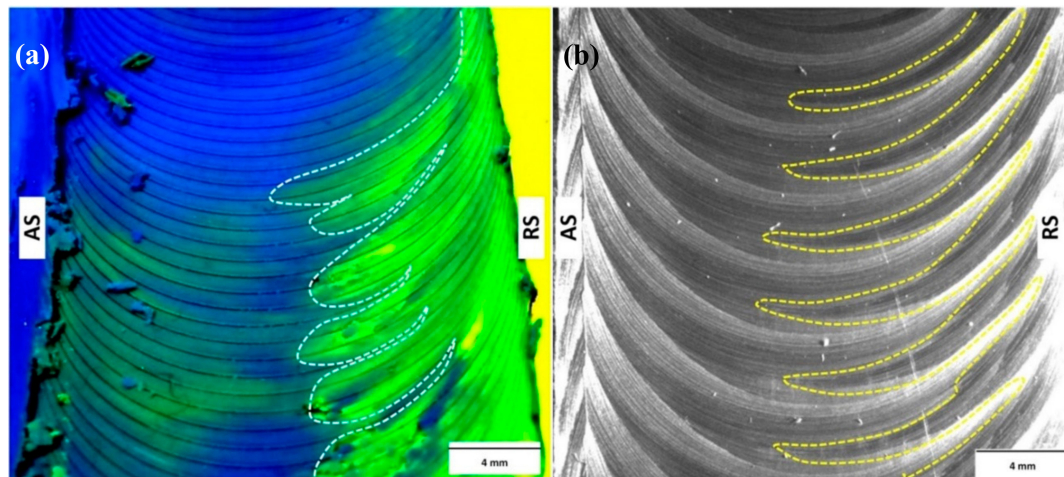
Macroscopic structural features of bobbin friction stir welding, (a) plasticine slab (75 rpm, 50 mm/min), and (b) AA6082-T6 aluminium plate (650 rpm, 400 mm/min). In both cases, the rotation is clockwise when viewed from above, although, this view is from below. Figure shows the common features. Image adapted from Tamadon et al., *Metals*; published by MDPI, 2018 [14].
